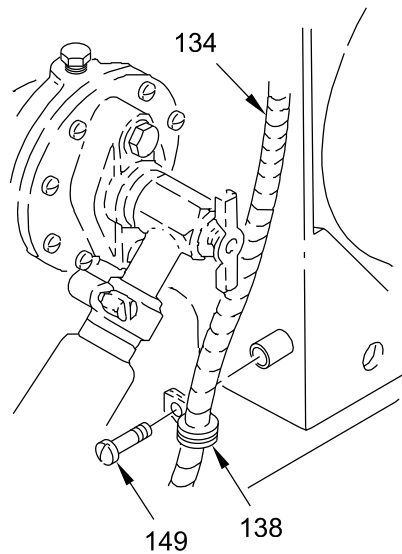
Wiring Harness to Mounting Bracket – Installation.
